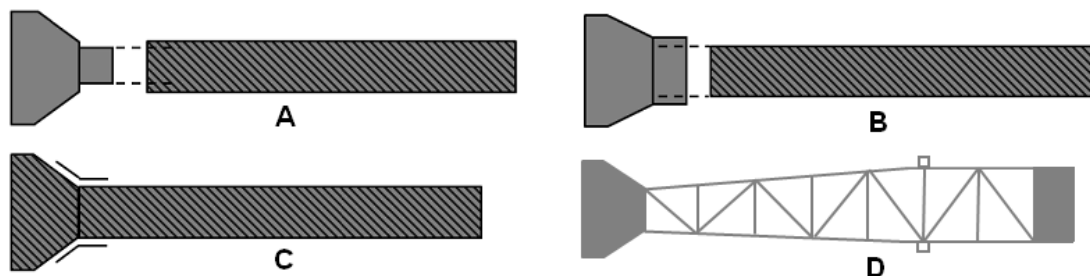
Concept A) mast head partly inserted in the mast, concept B) mast partly inserted in the mast head, concept C) joining with winded composite, Concept D) closed mast head attached to a metal truss structure.
